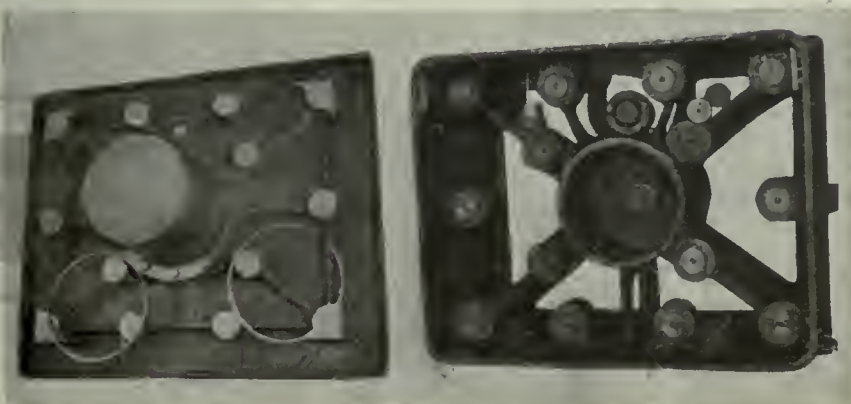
THE HERMAN PNEUMATIC MOULDING MACHINES DEVELOPED AT ZENLENOLE, PA.
